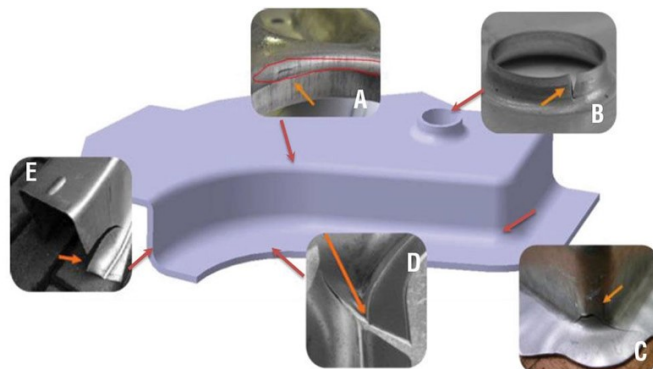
Edge cracking on the radius (A), edge cracking after hole flanging or collar forming (B), shearing crack at the deep-drawn edge (C), edge cracking at the flange (D), and edge cracking at the open head (E) [111]
